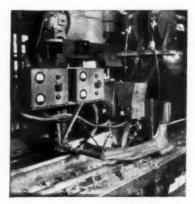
General view of welding operations showing relative length of fixture and finish welded assemblies at center and right, foreground.
